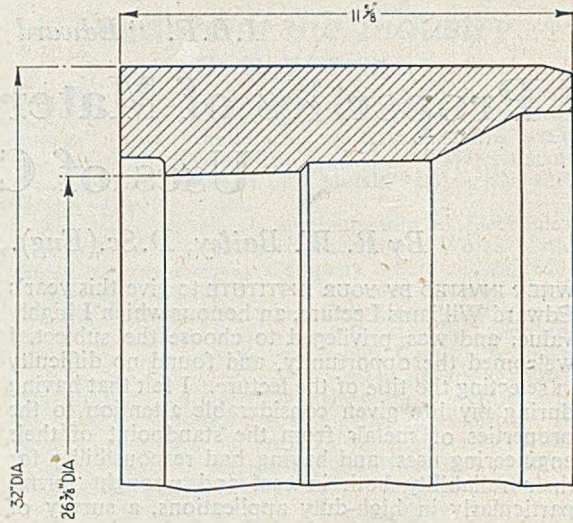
Dimensions of a High-tensile Manganese/Aluminium/Brass Retaining Ring for a Single-phase Turbo-alternator. (See Table III.)
